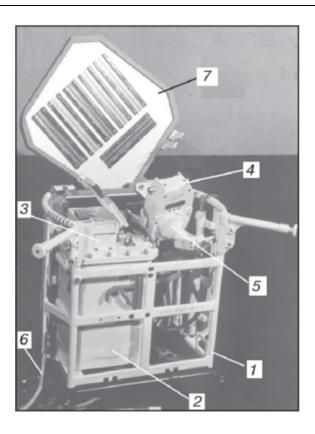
VHT, 1—container; 2—secondary power source; 3—control panel; 4—working tool; 5—handle with a trigger; 6—cable; 7—6-sample board [25]
